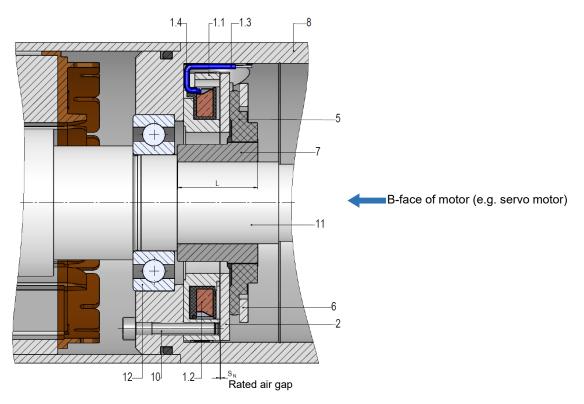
/2: Face mounting of spring-applied single-disc brake SL 502..A00 (example) to the motor (e.g. servo motor); contact of hub (7) with stop shoulder of motor shaft (11); assembly of hub (7) and motor shaft (11) by interference fit (see Section 4.1.2)
